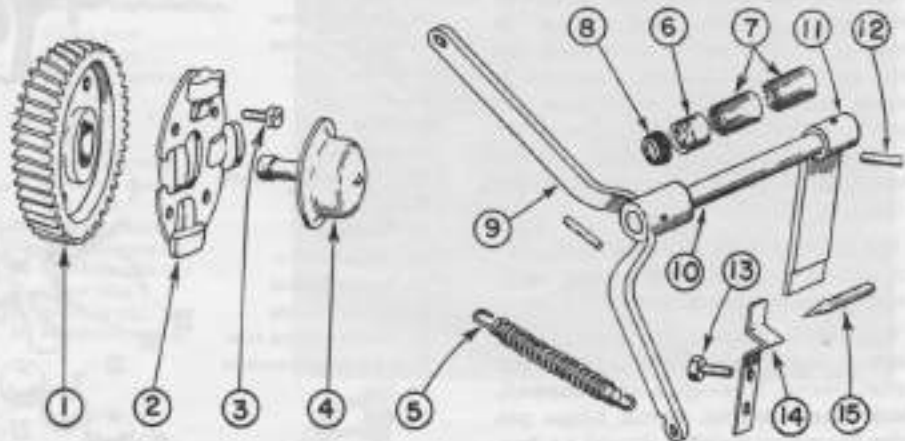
Models 44, 44K, 44LP, 55, 55K and 55LP governor exploded view. The governor can be removed after removing the timing gear cover.
